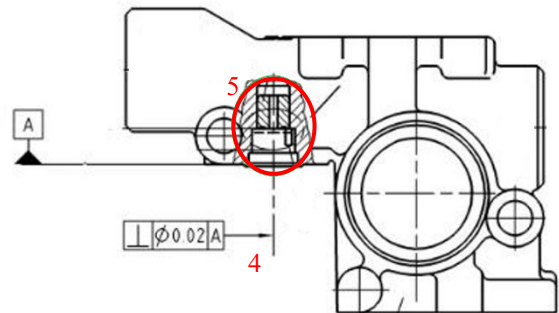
Perpendicularity $\perp 0.02$ mm to Datum A (mark 4) and $\text{Ø}8 \times 8$ hole (highlighted with a red ellipse, mark 5)
